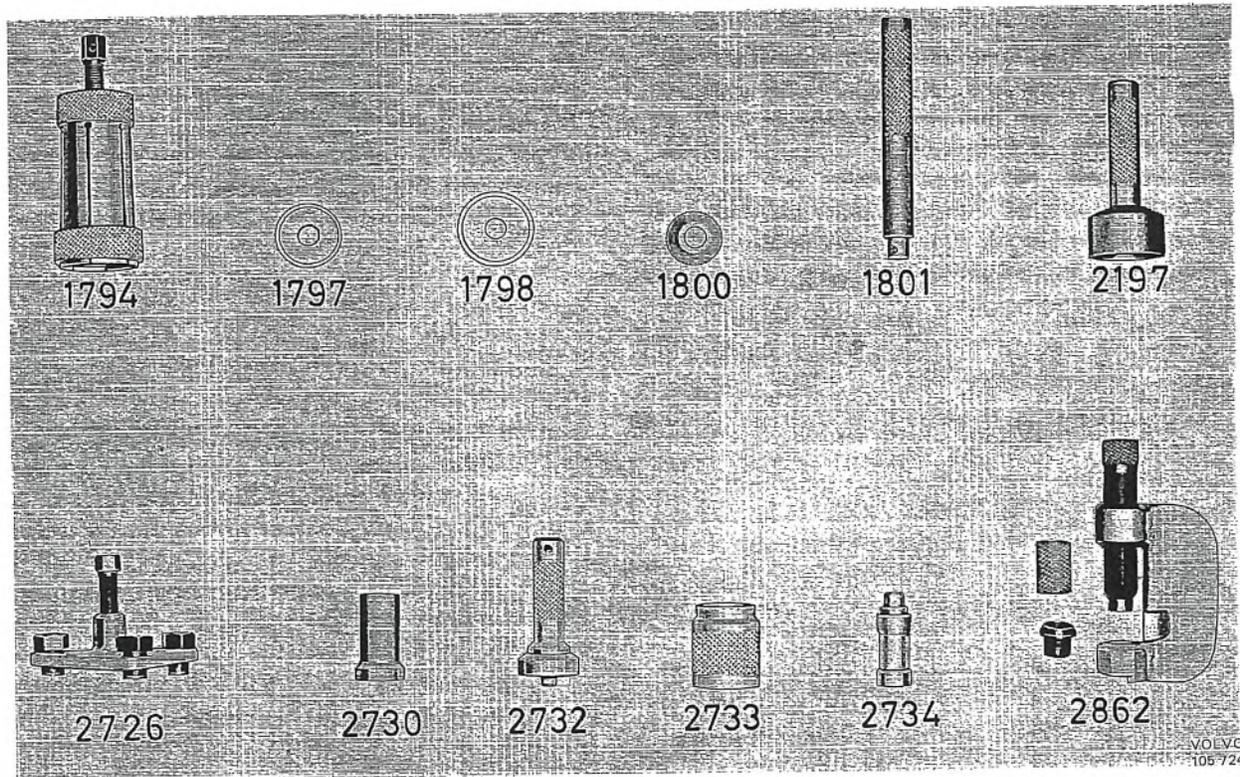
Tools used for work on the rear axle suspension and hub
